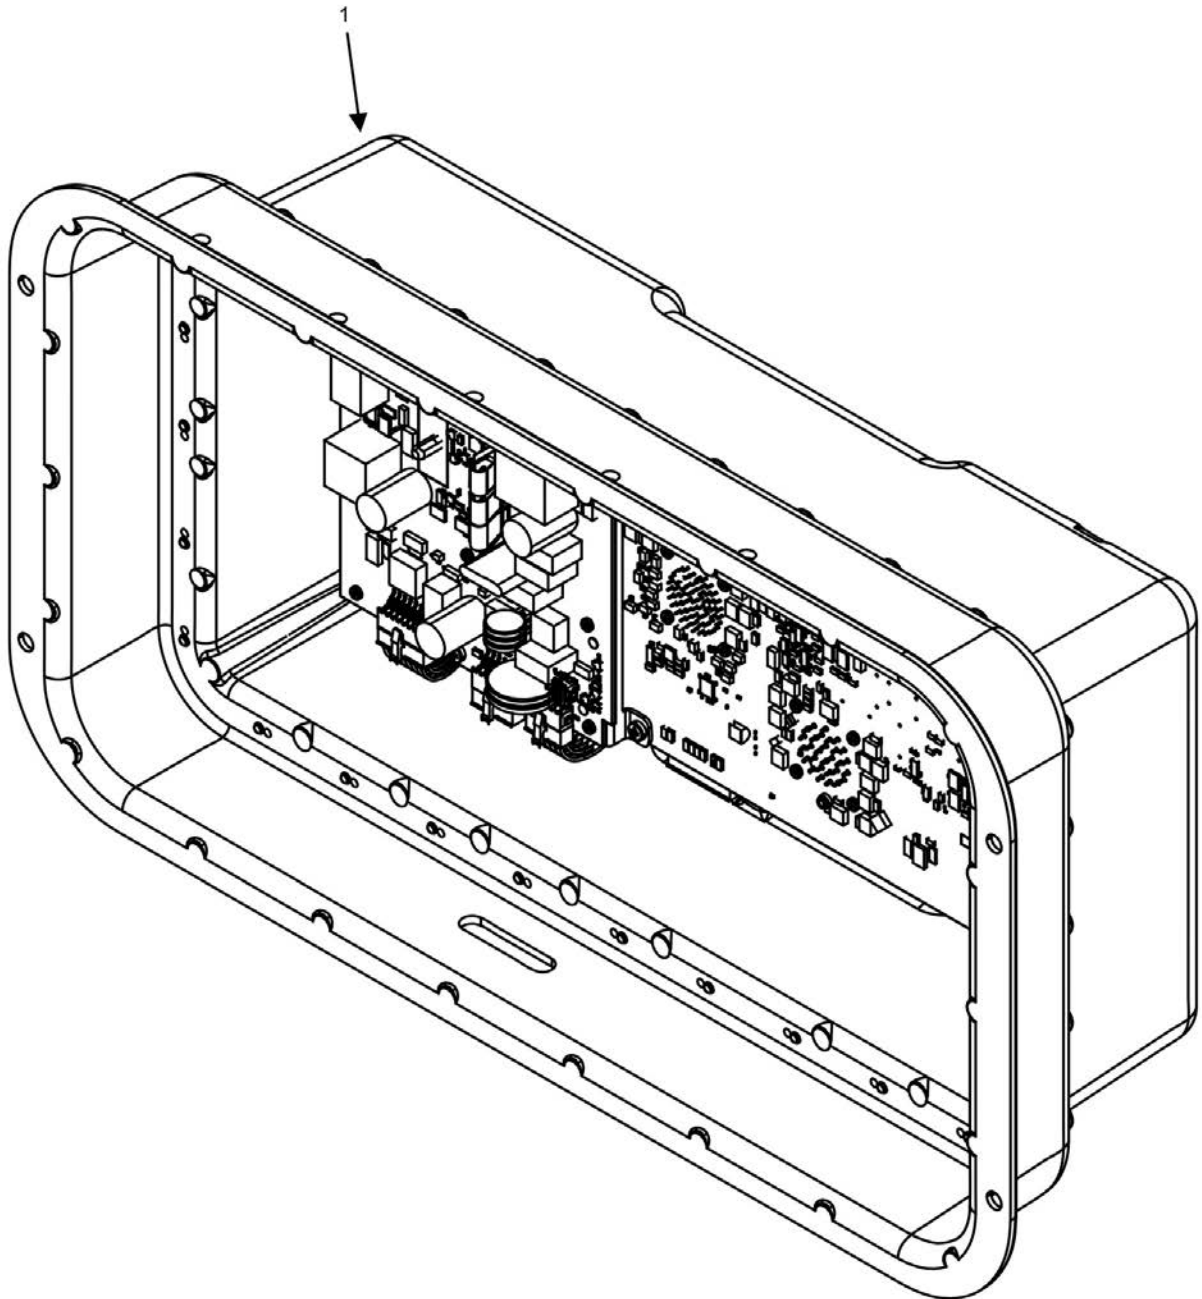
DCS Enclosure Assembly (Sheet 1 of 3).
